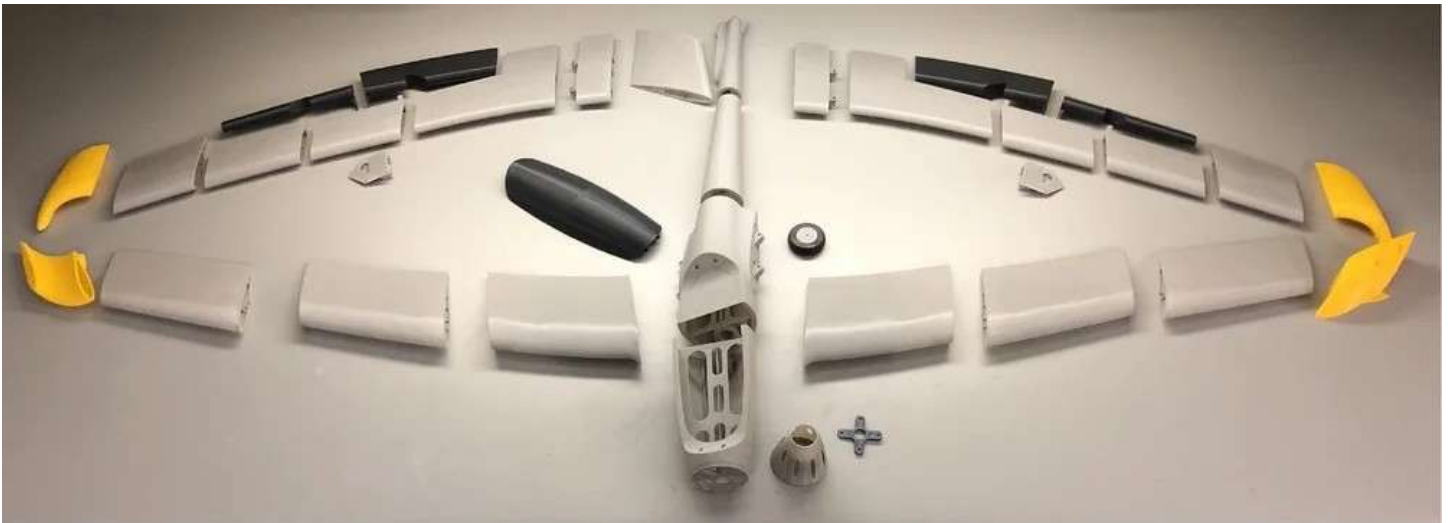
X-100 Infinity Wing V2 3D Printed Parts
